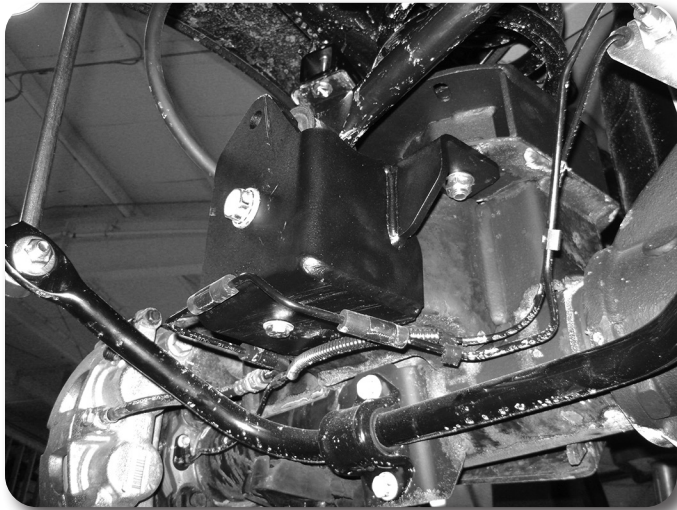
Shown w/coil spacer installed (not included in 4.5" Kit)
